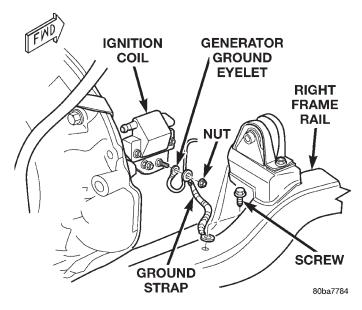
Engine-To-Frame Ground Strap Remove/ Install - 2.5L Engine
